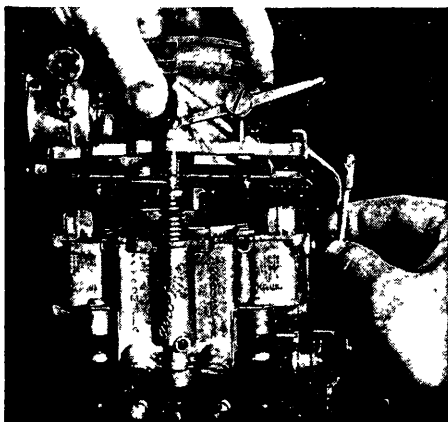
C Assemble pump piston into air horn. Assemble air horn onto main body, making sure pump piston is free from crases or curled edges when placed into cylinder. Attach cover screws
